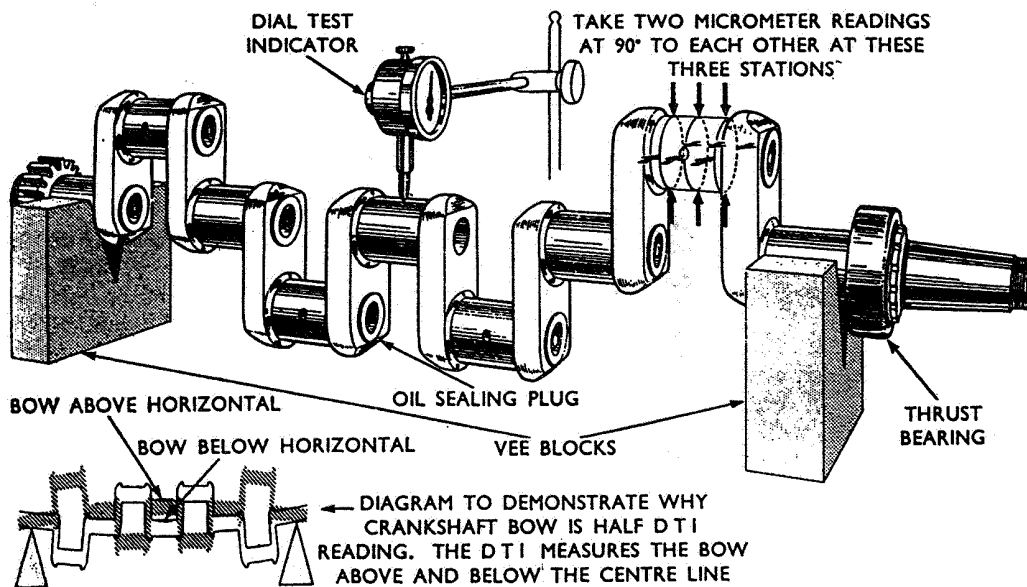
CHECKING A CRANKSHAFT FOR WEAR AND BOW
